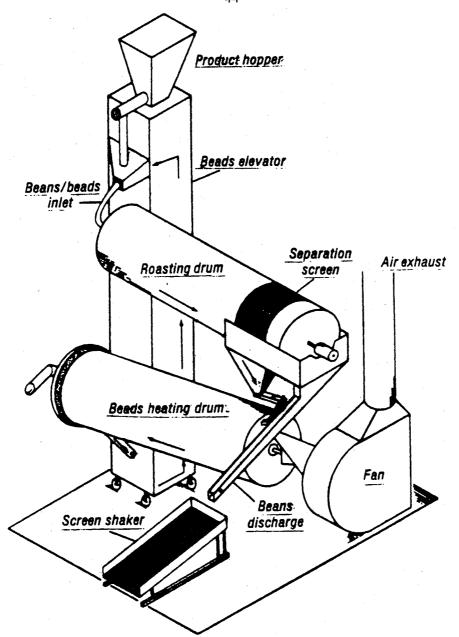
Schematic Drawing of the Solid-To-Solid Heat Exchanger
